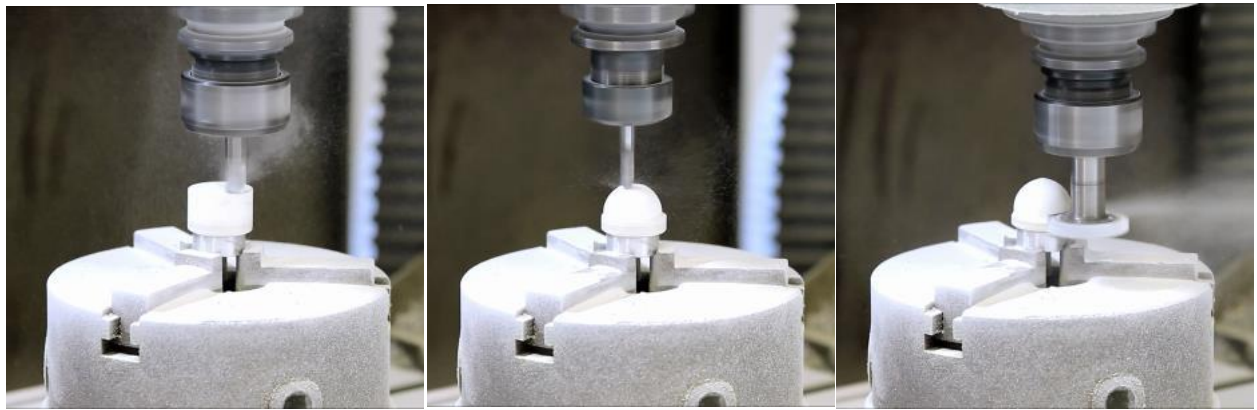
Stages of the machining process: (a) blank sphere machining; (b) finished sphere; (c) planar surfaces
